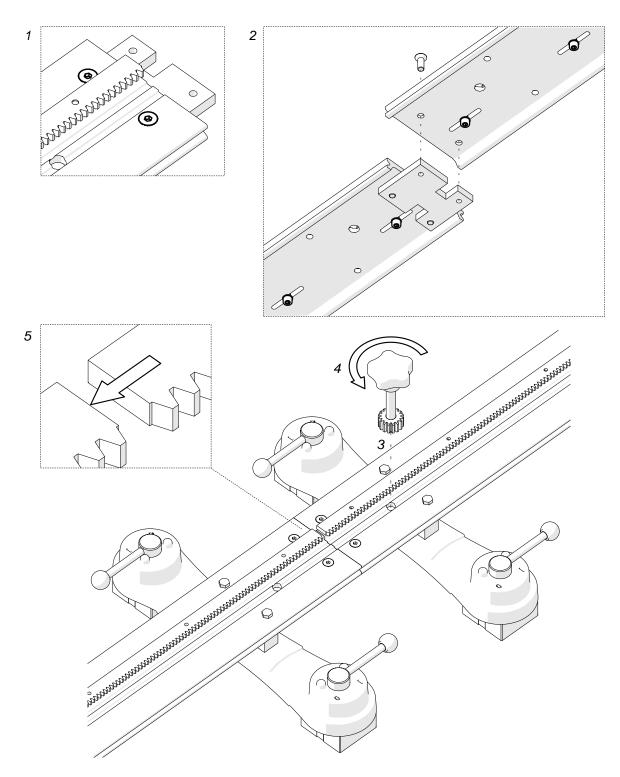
Removing the gap between the gear racks of a semi-flexible track
